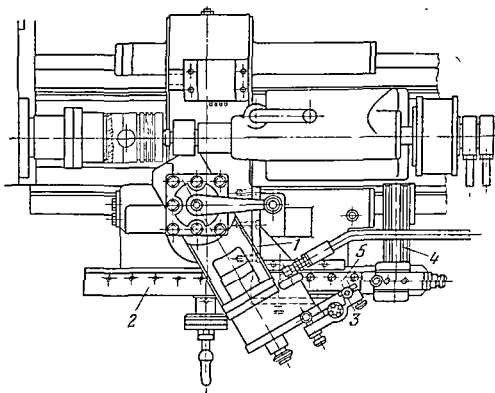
Hydraulic tracing slide, model TC-1, mounted on an engine lathe
